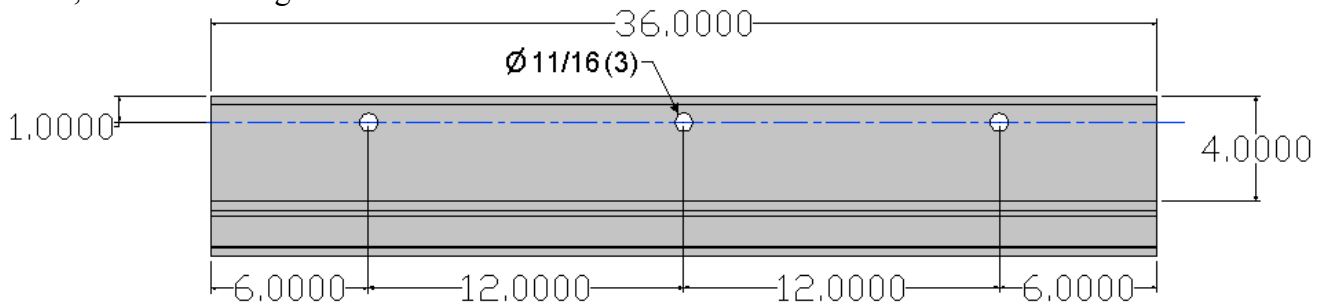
Top View of Trailer Receiver w/ hole-drilling locations shown
